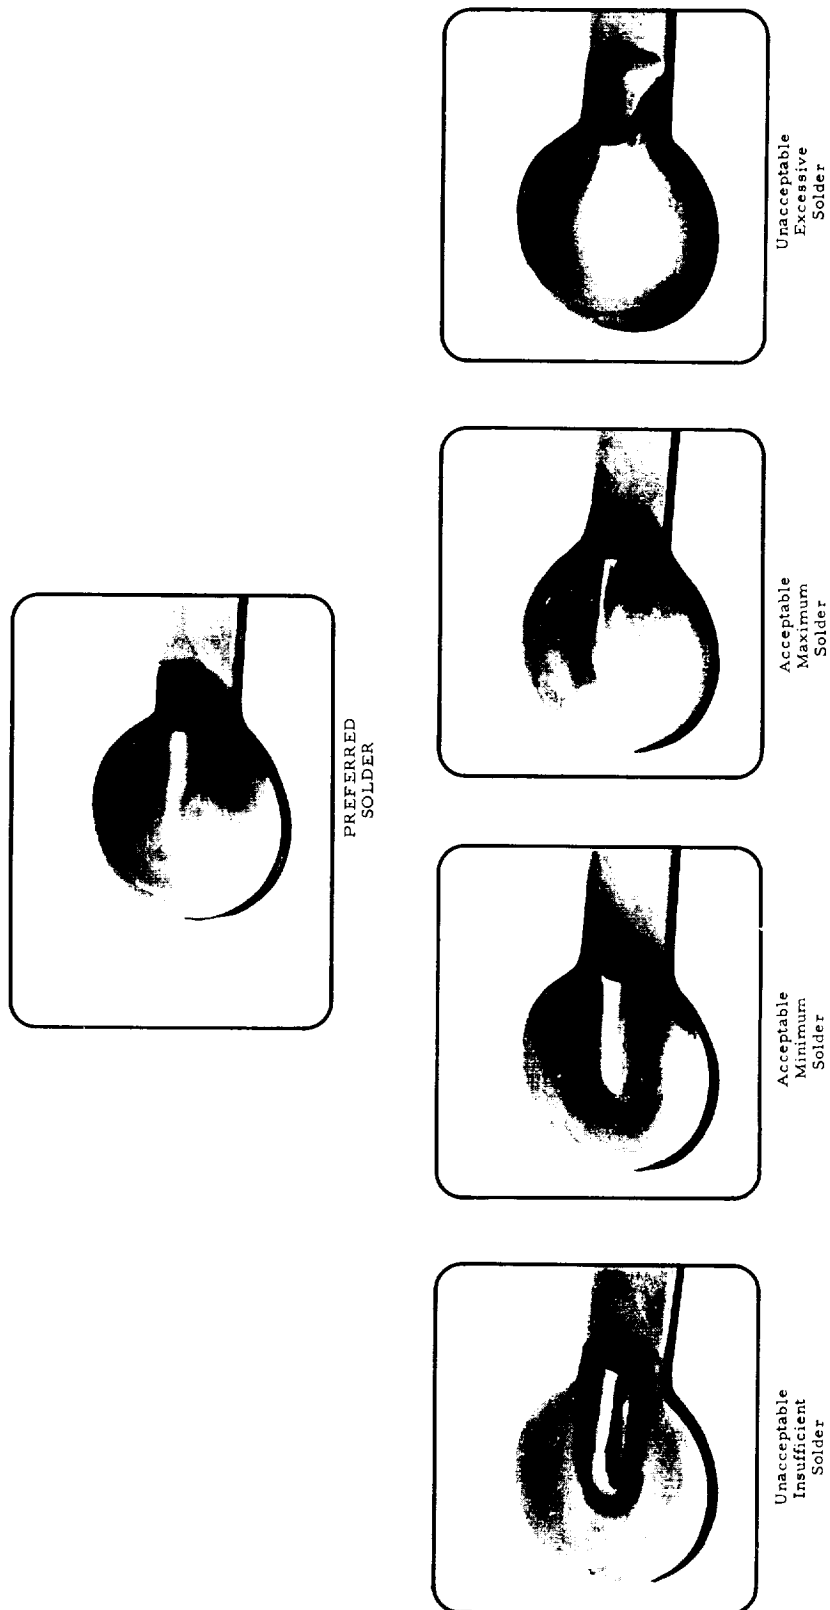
SOLDERED PRINTED WIRING AREAS
